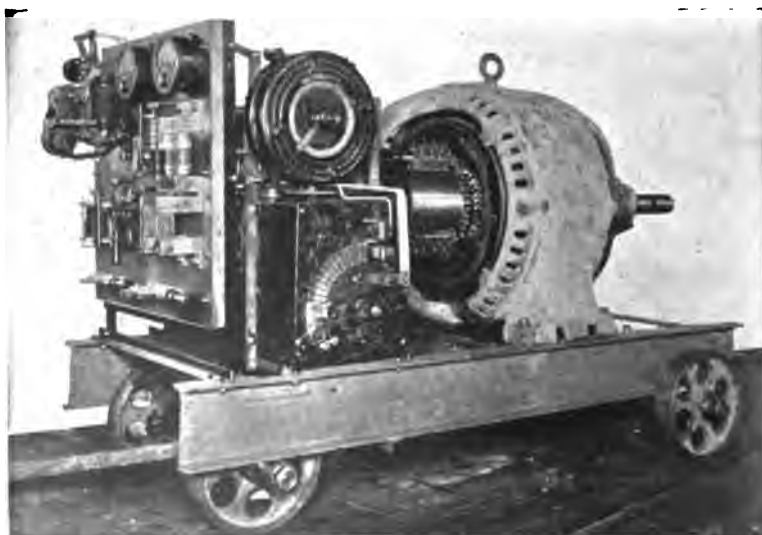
600-Ampere Portable Single-Unit Welding Outfit
